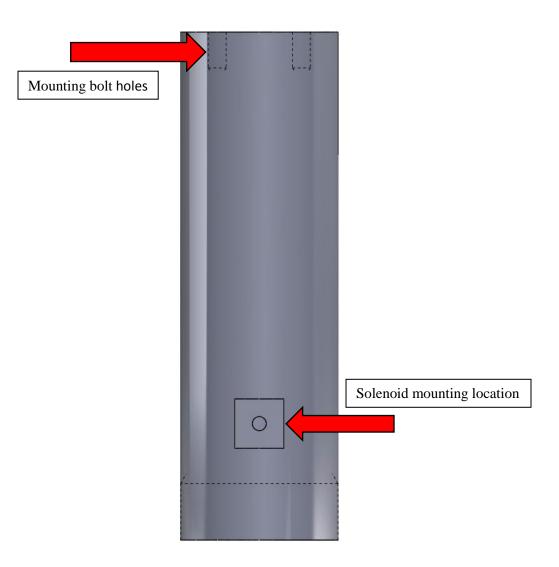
Outer Case with Solenoid Mounting Location Shown
